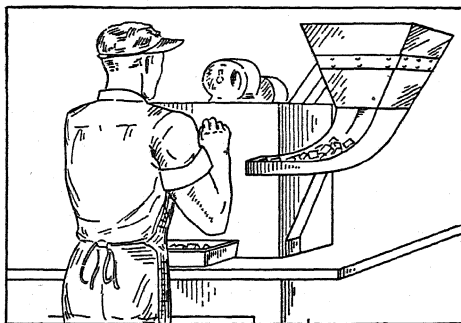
Gravity delivery chute with movement of parts actuated by vibration of machine.
